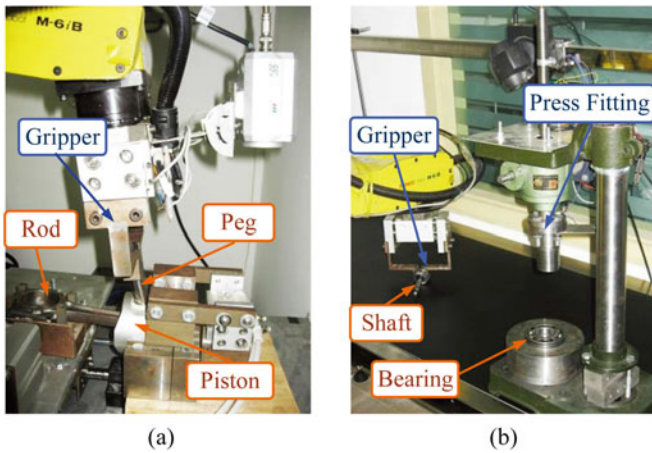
Round-peg-hole insertion is a typical operation in automatic manufacturing. (a) Peg-rod-piston insertion for the engine assembly, and (b) Shaft-bearing insertion. In (b), the gripper is grasping the shaft upper end, and the press fitting is used for the pressing at the last procedure of assembly.
